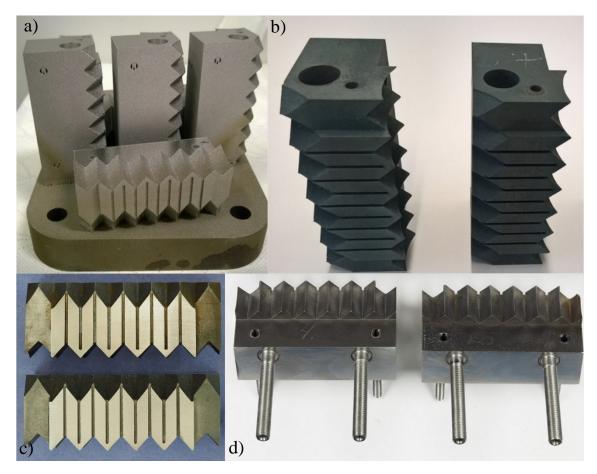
Heated cutter at different stages of 3D printing: a) in as-built condition, b) premachined and heat treated, c) after shot peening and grinding, d) finished pieces.
